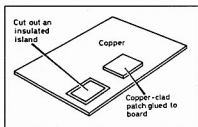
Connection point on the copper side can be arranged by cutting away the copper to form an insulated island (use a sharp hobby knife for this), or by gluing a small patch of copper-clad board on the copper side. (Courtesy RadCom).
